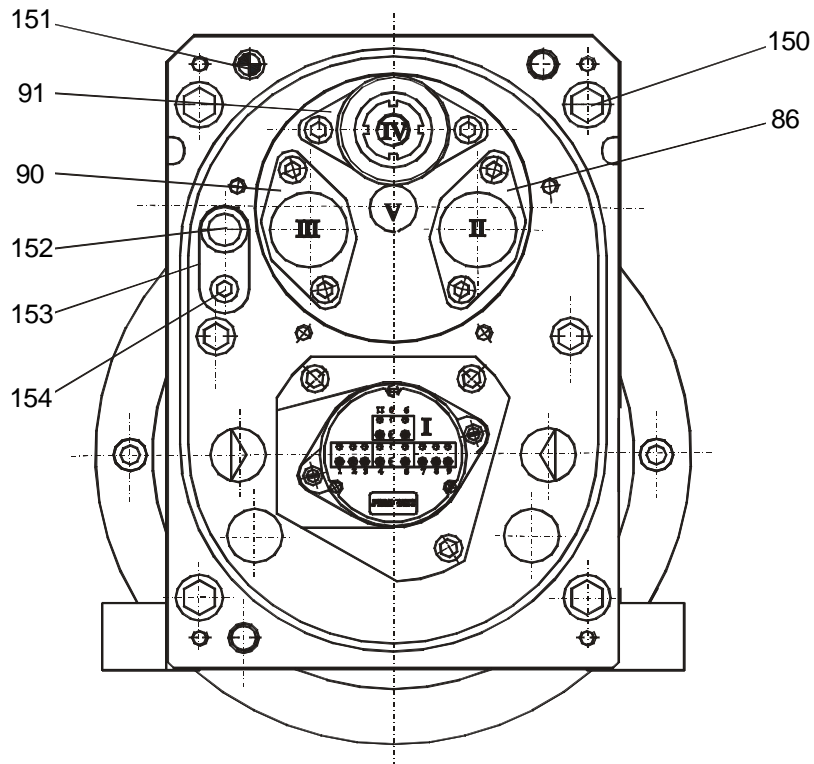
VIEW WITH BACK COVER AND MOTOR REMOVED.
